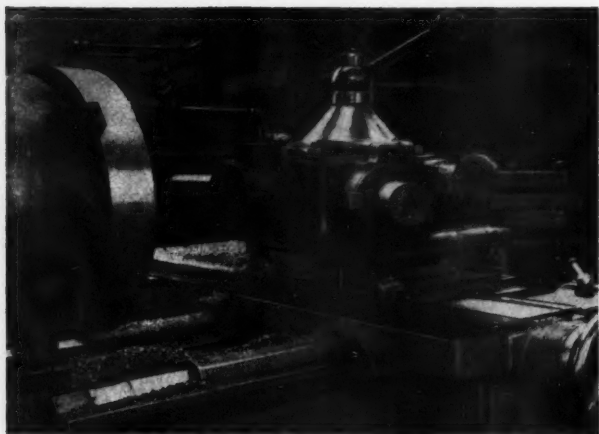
The set-up for machining face-plates on one of the company's 20-in. surfacing and boring lathes. A multiple tool *A* provides for boring the inner end of a stepped hole to 3 in. diameter, chamfering the end of the hole, boring a parallel register to 5.359 in. diameter, $-0, +0.006$ in., roughing a taper bore, chamfering the end of the taper bore and facing a narrow land. The taper bore is finished with the floating reamer at the left, and the land is again faced. Subsequently, the front of the workpiece is machined to blend with the land face
